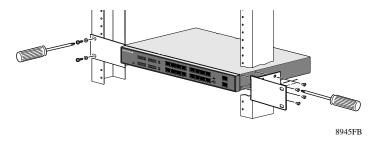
Attaching Mounting Brackets to the Model FS518T Switch
